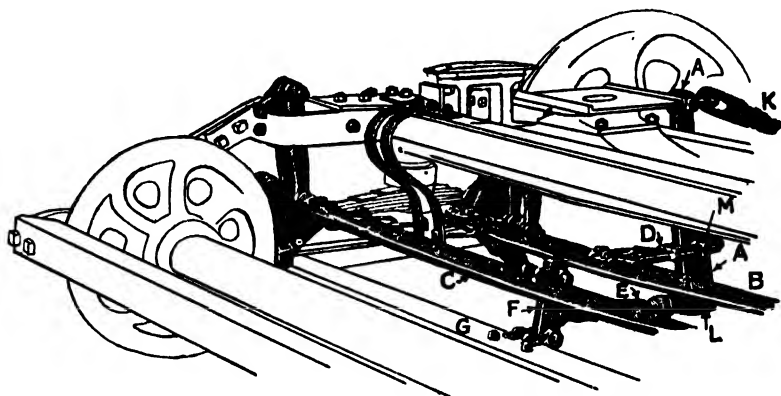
Arrangement of Brake Gear on Brill "39 E" Maximum-traction Bogie Truck.
